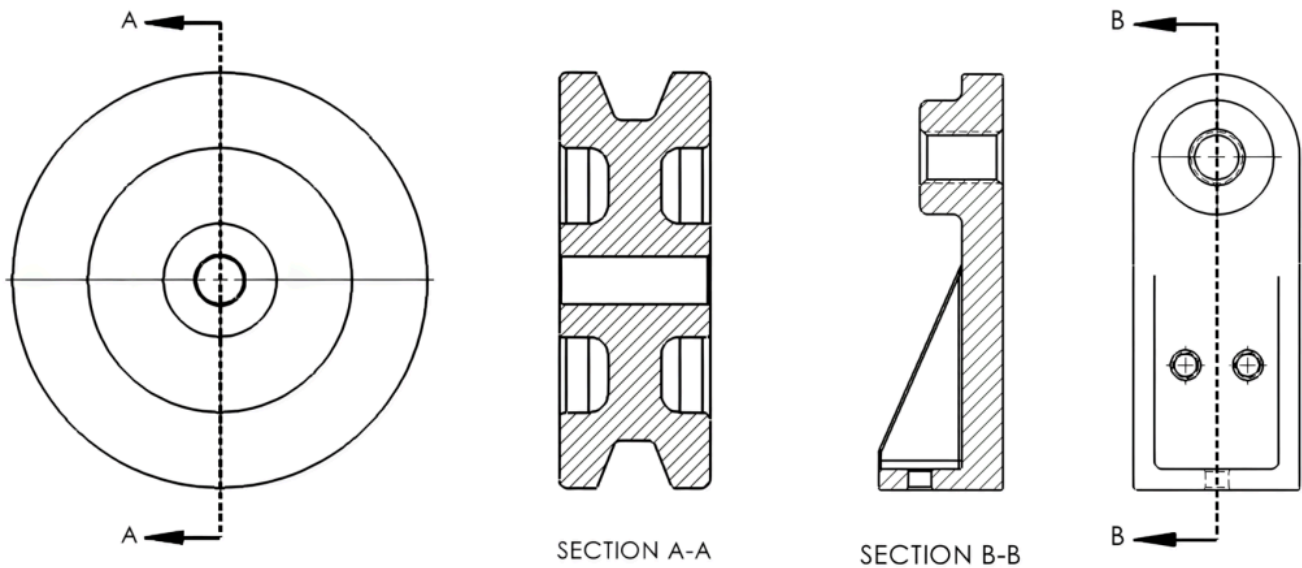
Full section view – part is cut in half, revealing the full section.
